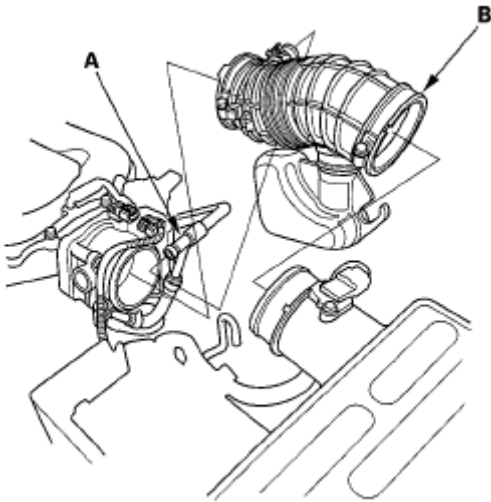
Identifying Breather Pipe And Air Intake Duct
